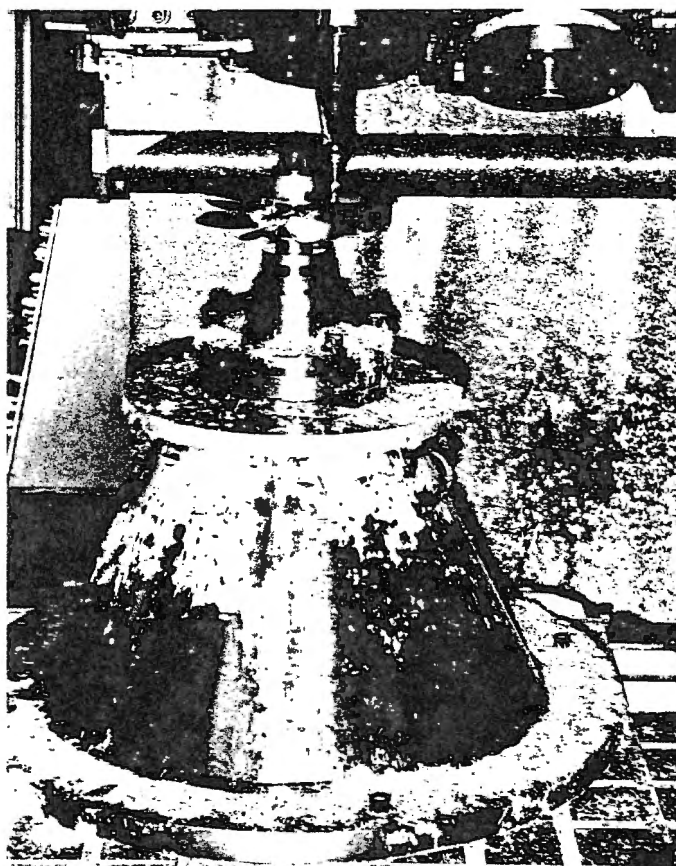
Typical 9-inch diameter Aluminum Propeller Model Being Cut on an OM-3 5-axis NC Continuous Path Milling Machine
